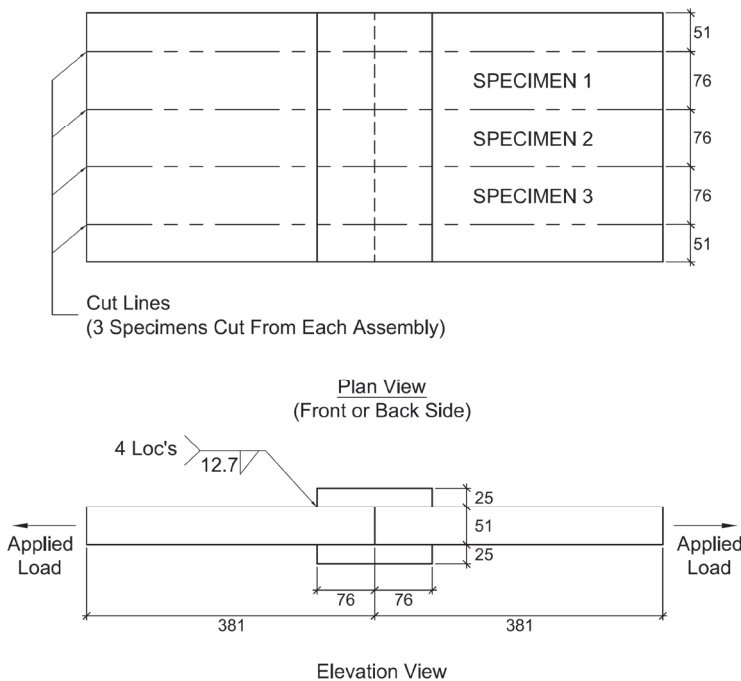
Complementary test transverse weld (T) specimen.
